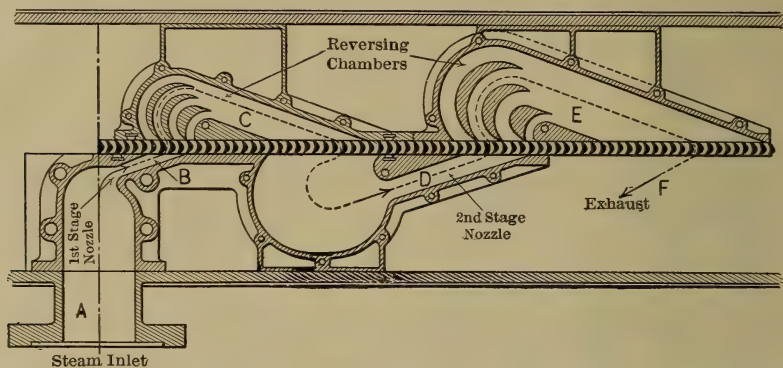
Arrangement of Blades and Nozzles — Westinghouse Impulse Turbine.
